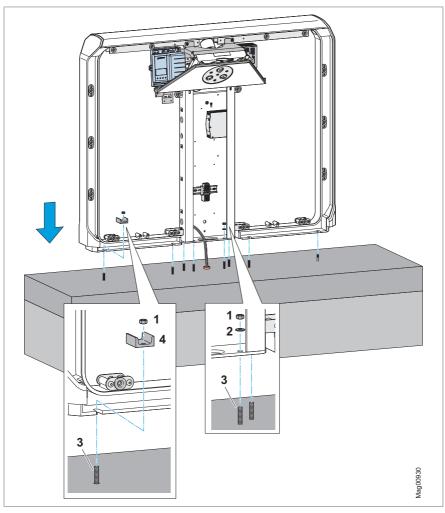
Mounting variant "Mount base plate" – Mount turnstile, shown here mTripod FMTP-ML
